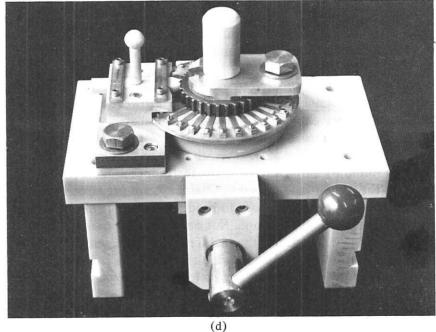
(c) Multiple cathode tool system for electrochemical dissolution of workpiece irregularities (By permission of Turner Manufacturing Co. Ltd., Wolverhampton). (d) Configuration of multiple cathode tools and anode workpiece for electrochemical removal of surface irregularities (By permission
